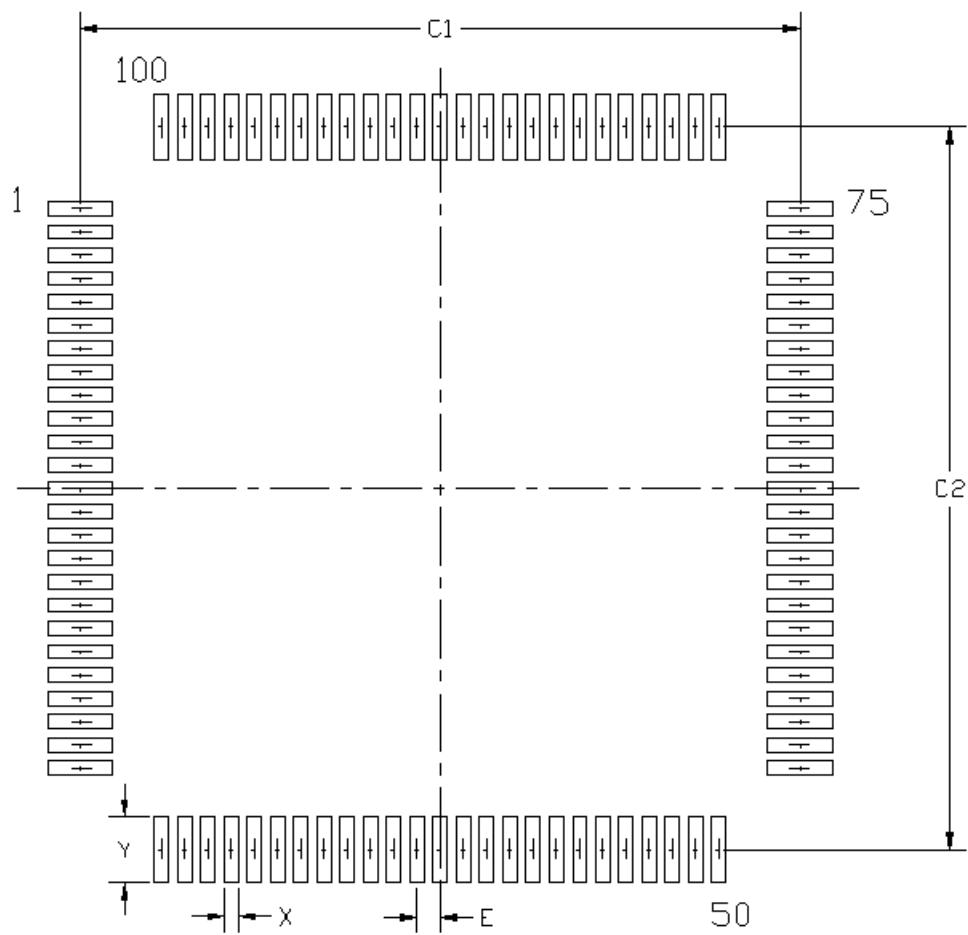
TQFP100 PCB Land Pattern Drawing
